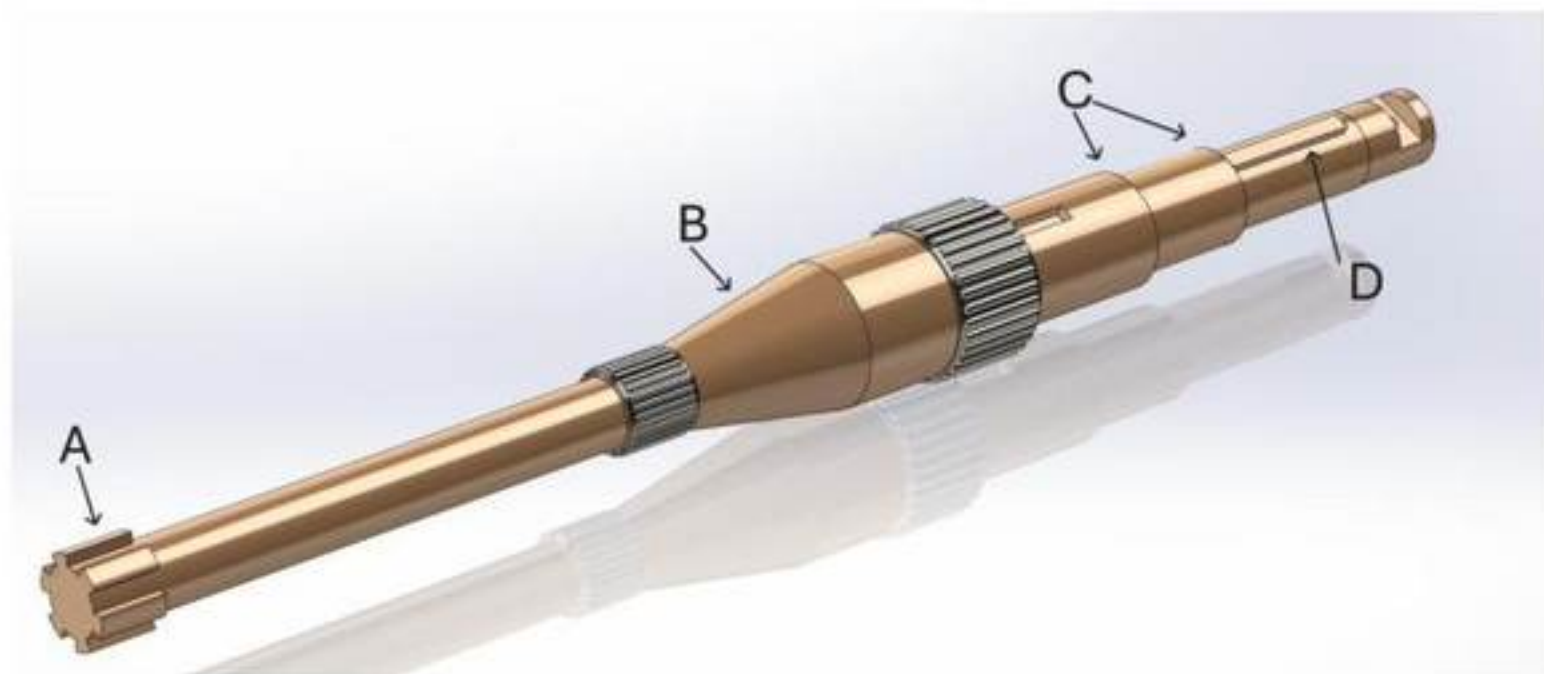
CAD Model of Inner Drive Shaft based on an open-source CAD model [19].
